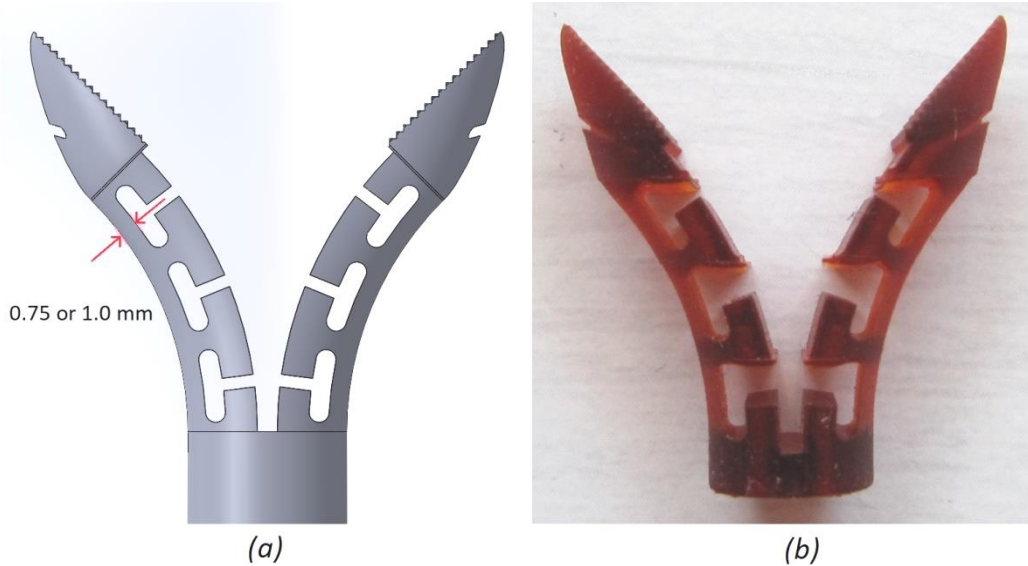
Part made in iteration round IV. (a) Front-view of digital drawing of thin-layer bending joint geometry, (b) front-view of 3D-printed part.
